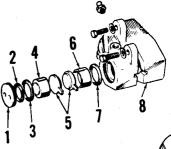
Exploded view of hydraulic brake master cyl-inder used on later Com-mando models.
